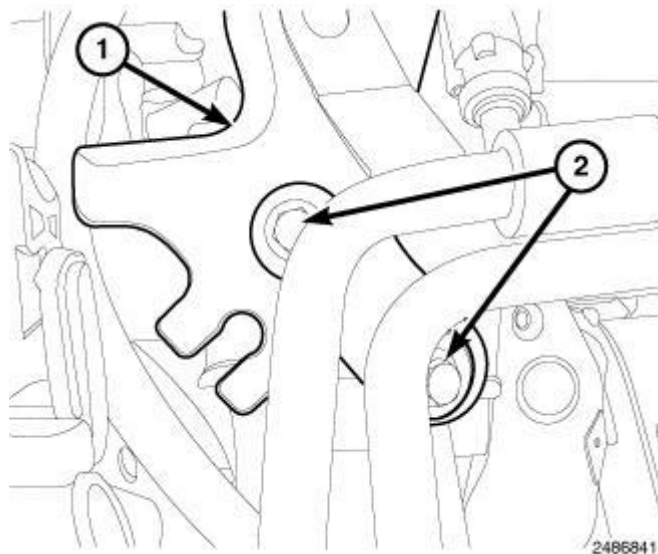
Installing Lock Clip On Swirl Valve Linkage
